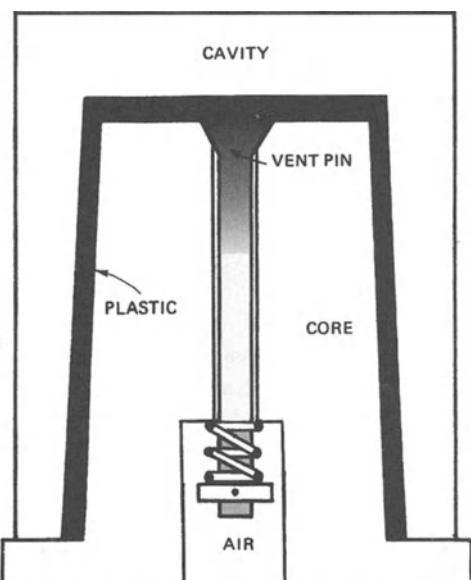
Use of a venting pin to break the vacuum on the core. The pin is held closed by a spring; the pressure of the material on the head of the pin forces it tightly closed.
